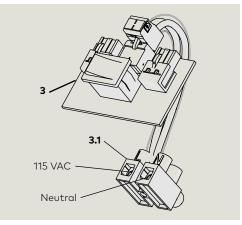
115 Vac terminal block and wire harness assembly
